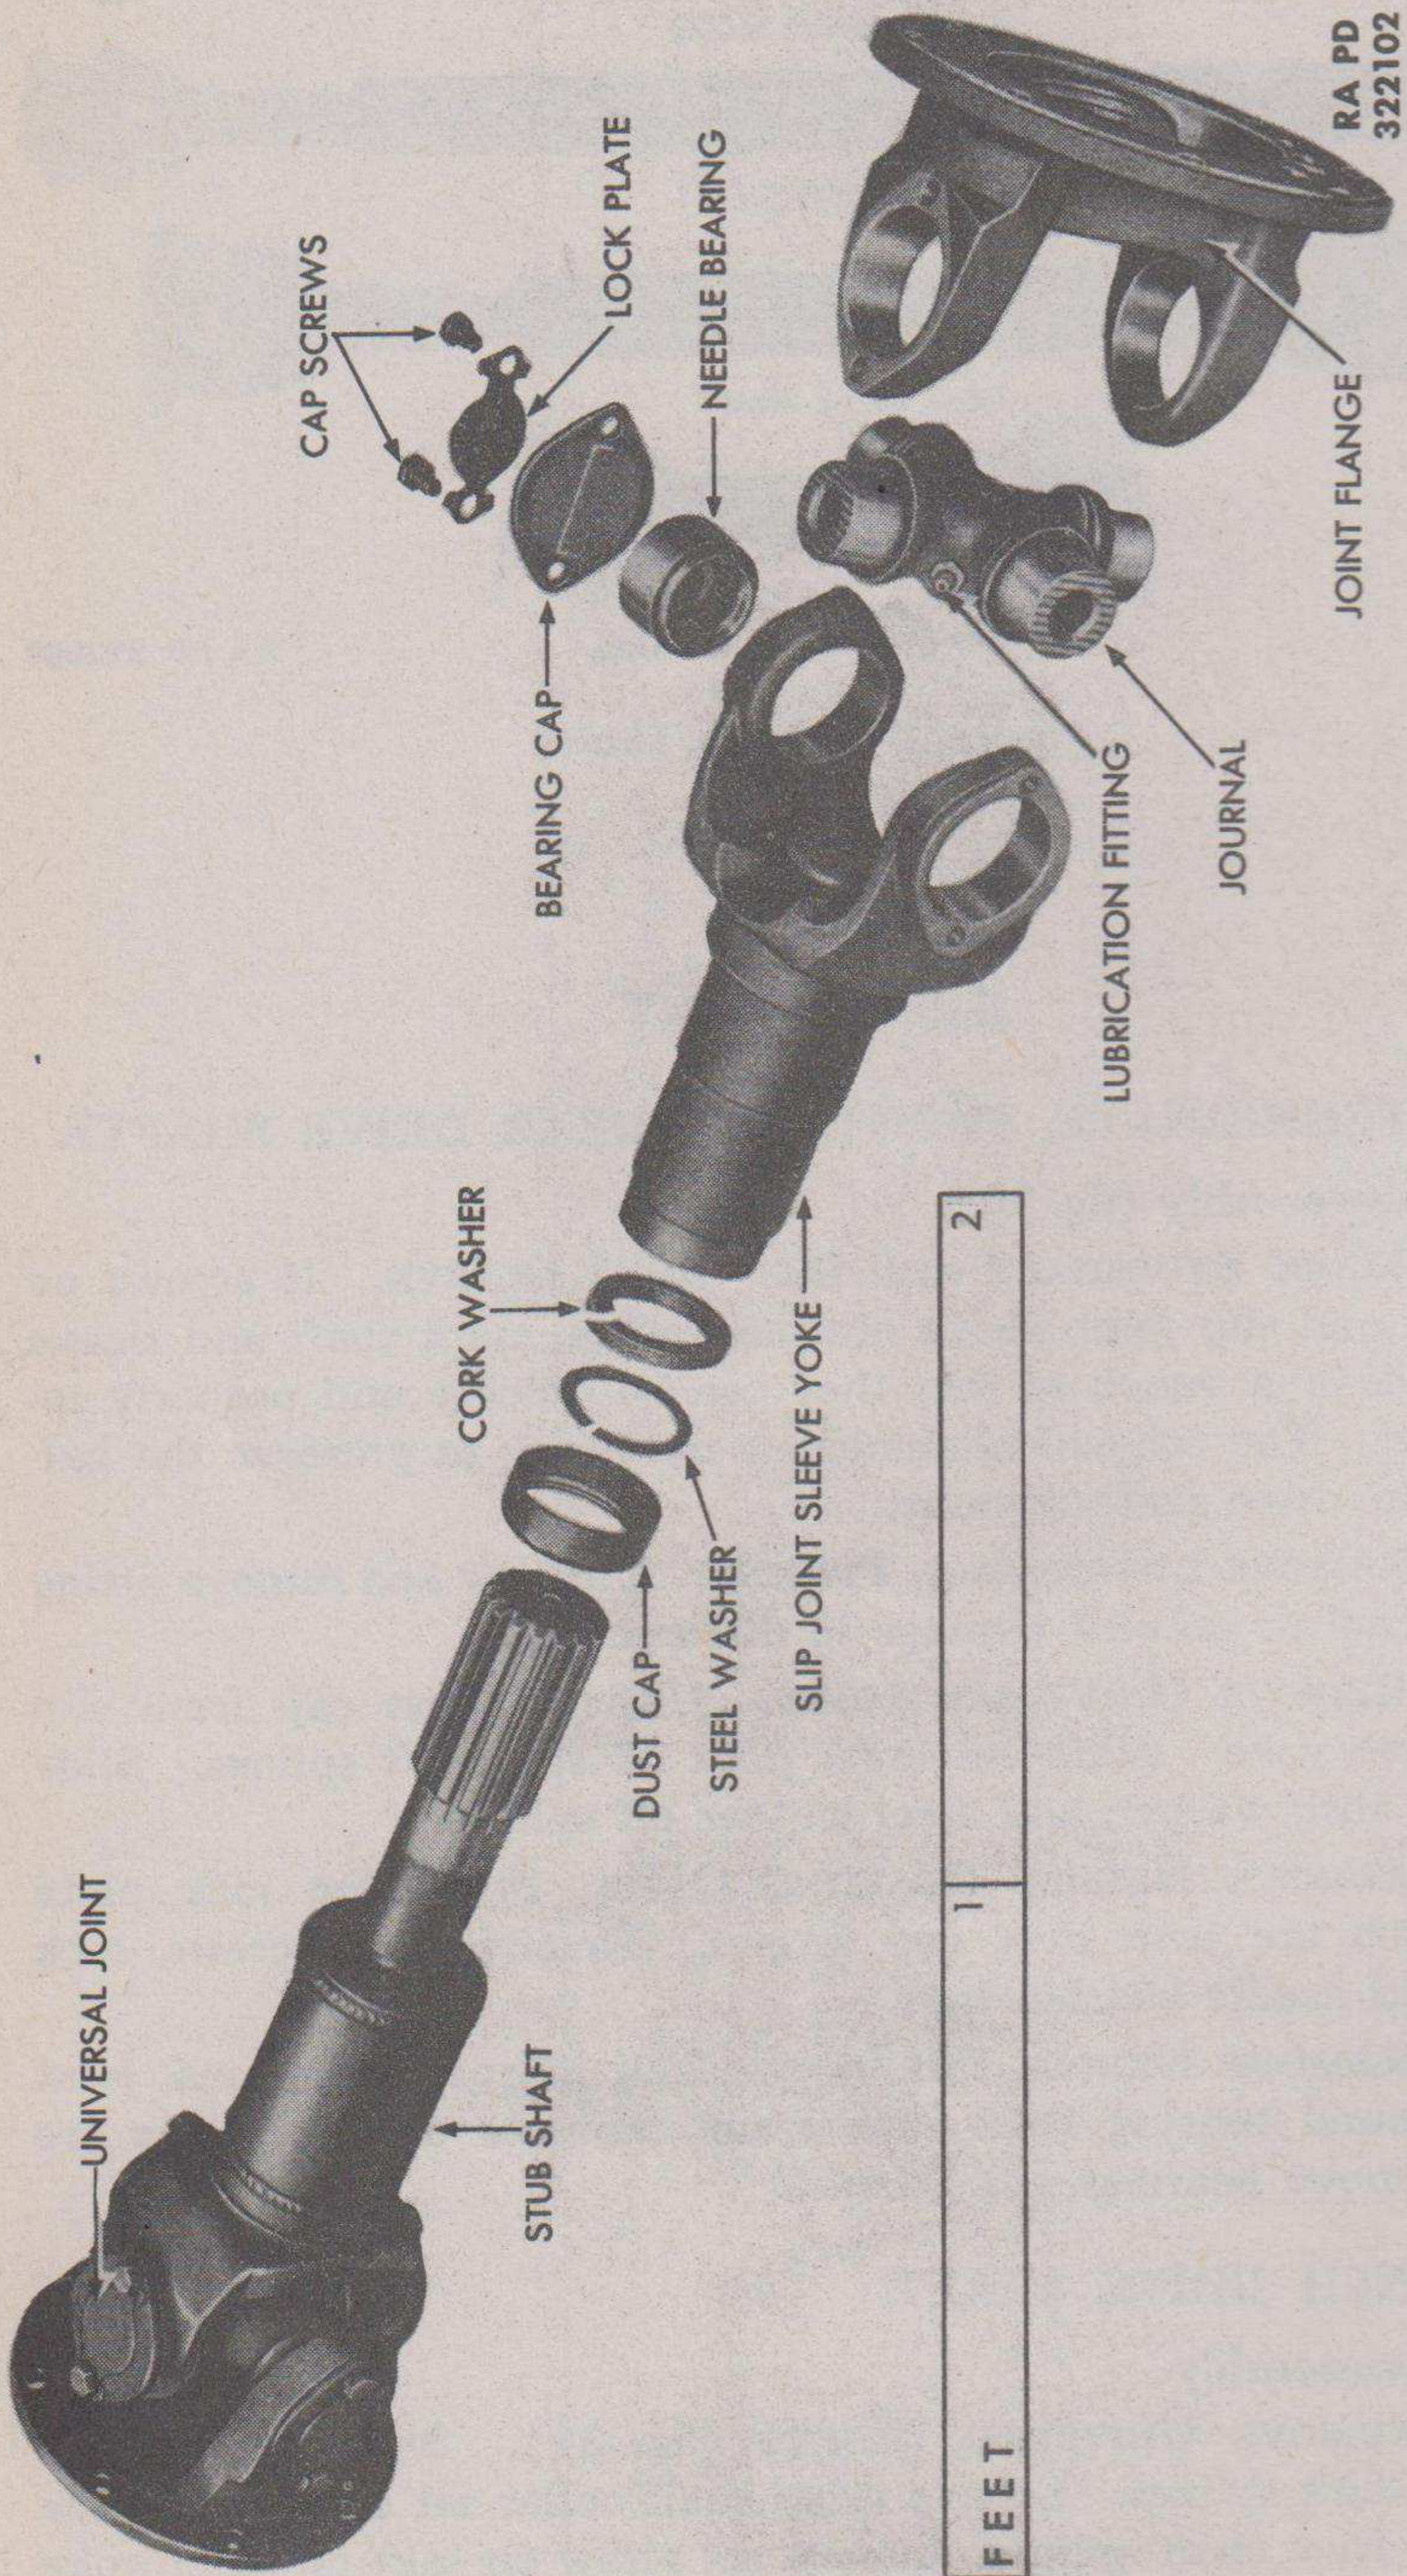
Intermediate Drive Shaft Universal Joint Disassembled
